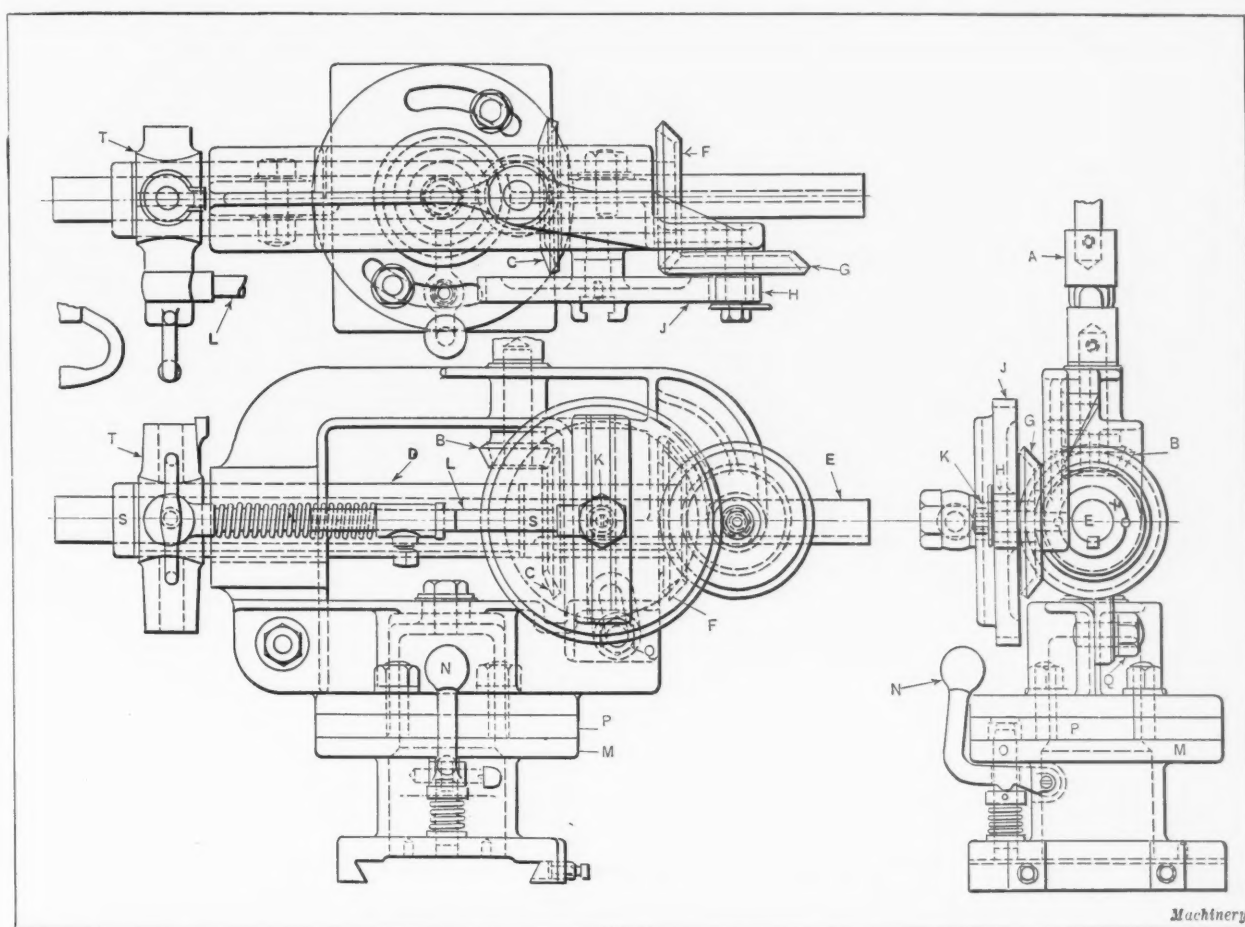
Construction of Main Head of Reciprocating Type of Automatic Buffing Machine
